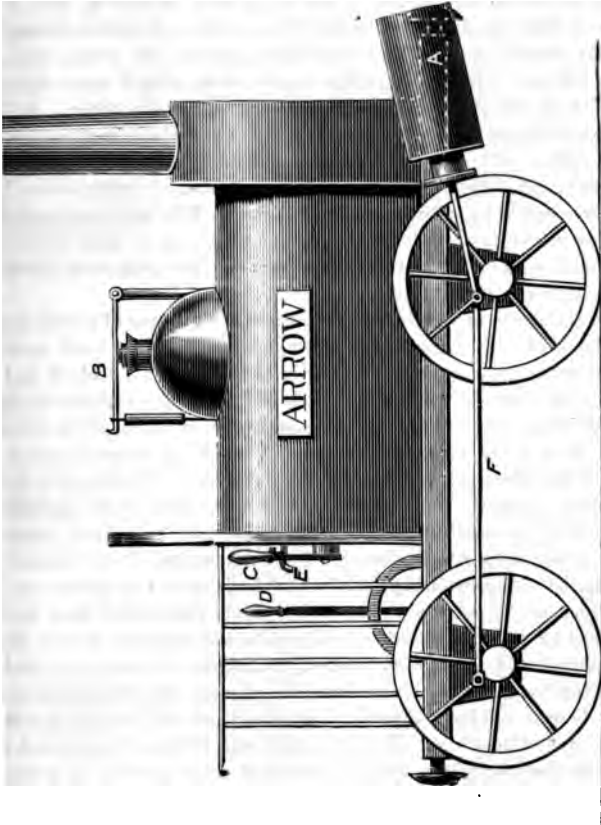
LOCOMOTIVE ENGINE, WITH OSCILLATING CYLINDERS.
